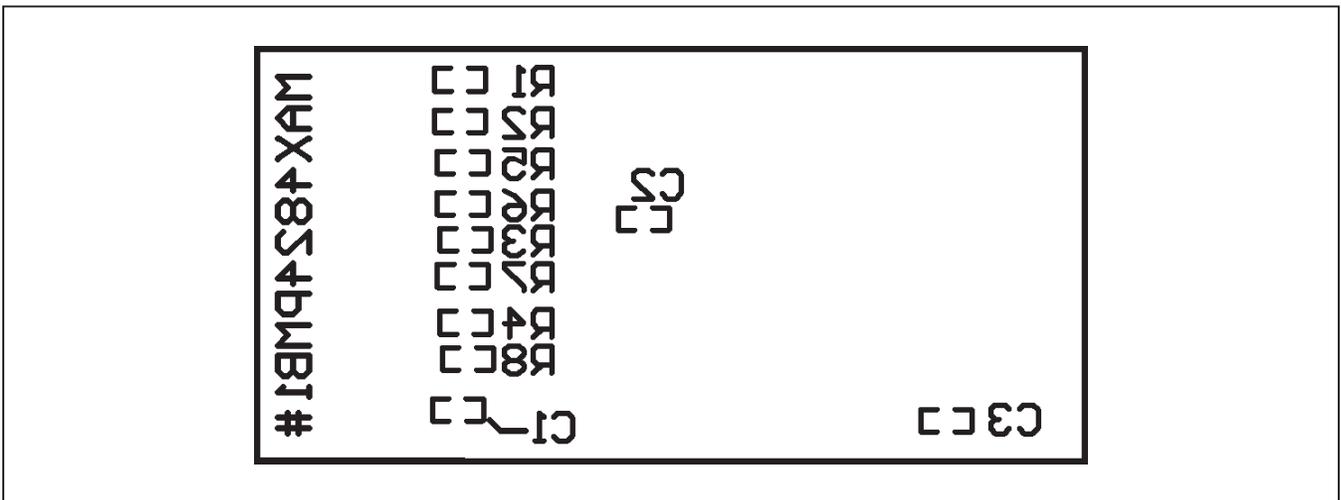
MAX4824PMB1 Peripheral Module Component Placement Guide—Solder Side
